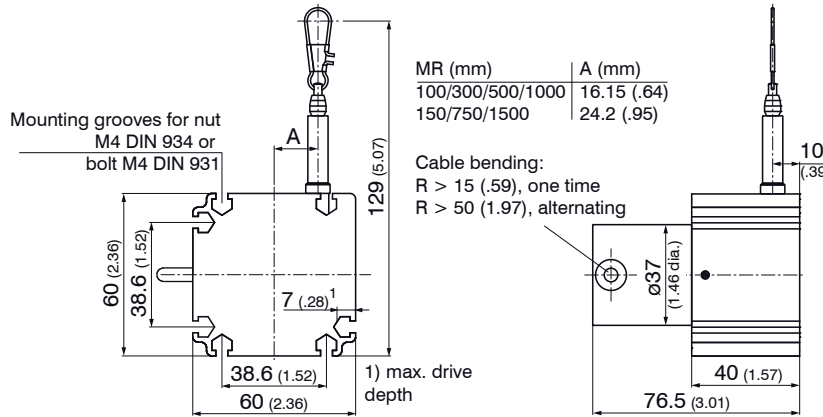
Dimensional drawing WDS-... - P60 - CR - P, dimensions in mm (inches), not to scale
